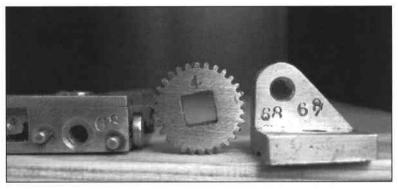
Blank 68 under governor and twice on cylinder bearing; blank 4 on cylinder drive gear.
